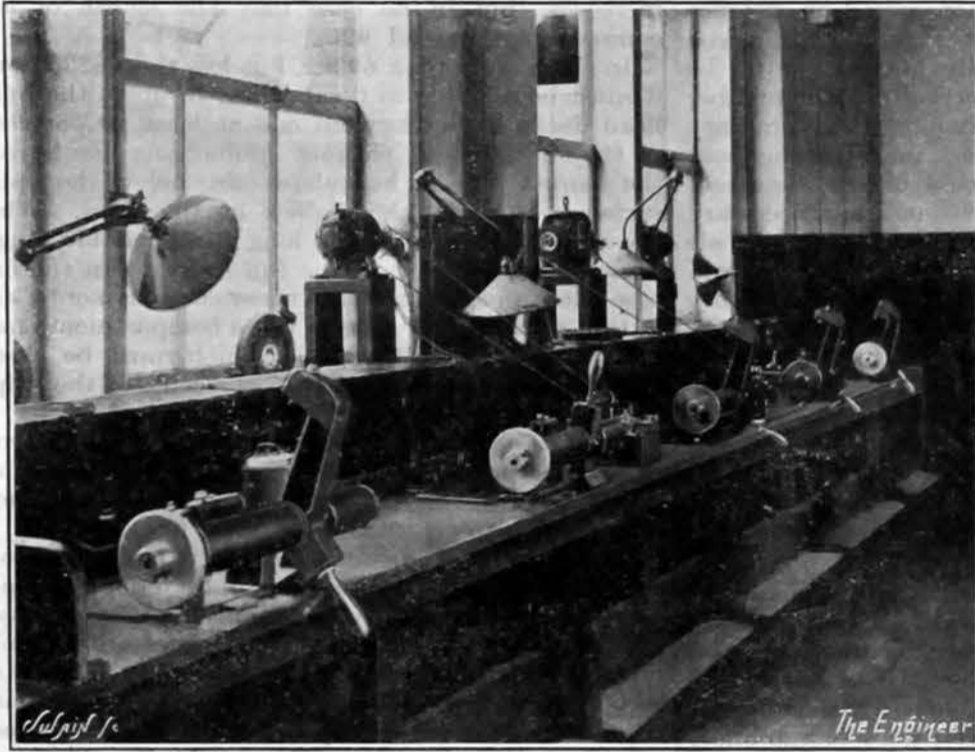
PUNCH JUSTIFYING-GRINDING MACHINES
